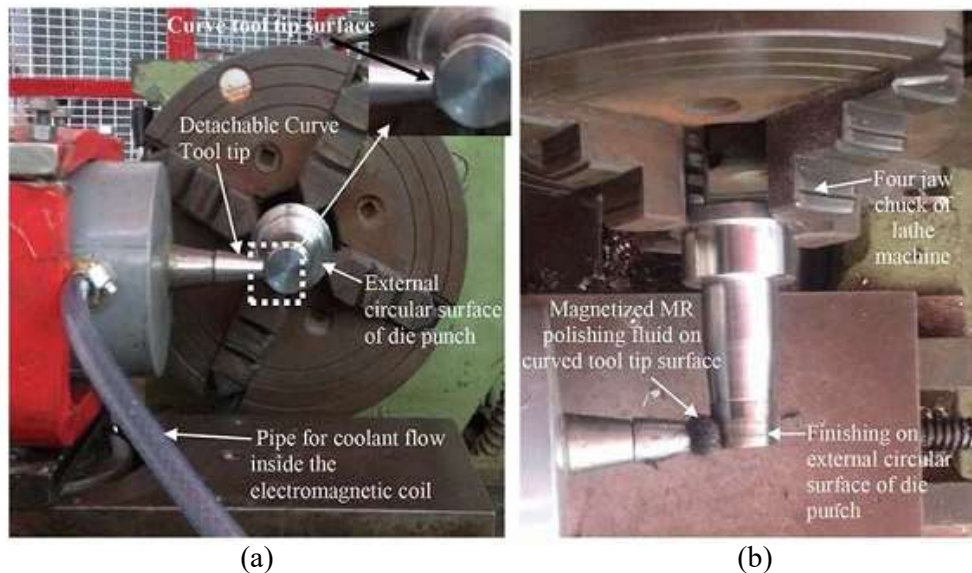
Magnetorheological finishing (a) Experimental setup for external cylindrical surface finishing and (b) Magnetized MR polishing fluid [19]
